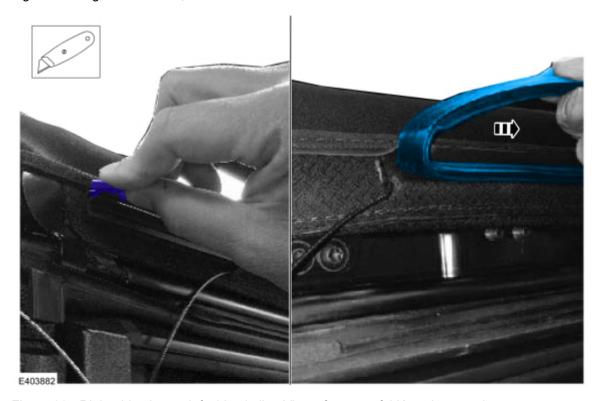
Right side shown, left side similar. View of successful K-seal removal.
